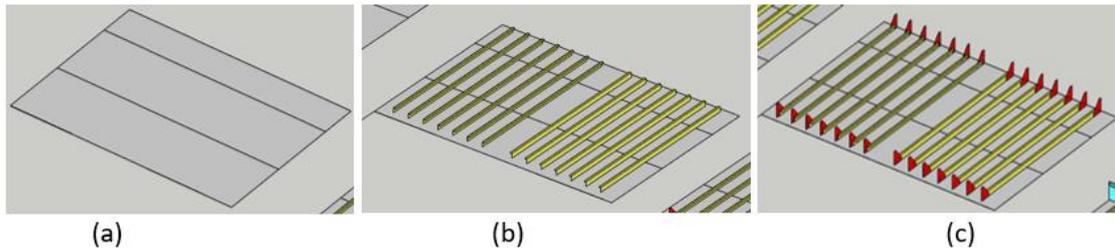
Joint (a) Transversal bulkhead plate, (b) Stiffener to transversal bulkhead plate, and (c) Bracket to vertical stiffener
